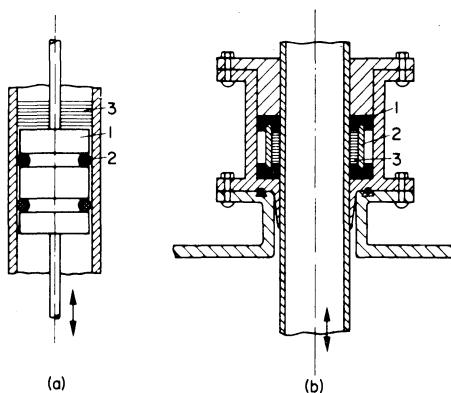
Oil-sealed sliding joints: (a) piston seal; (b) seal for sliding pipe After Burger-jon^{182a} (*Courtesy of North-Holland Publ. Co. Amsterdam*)
